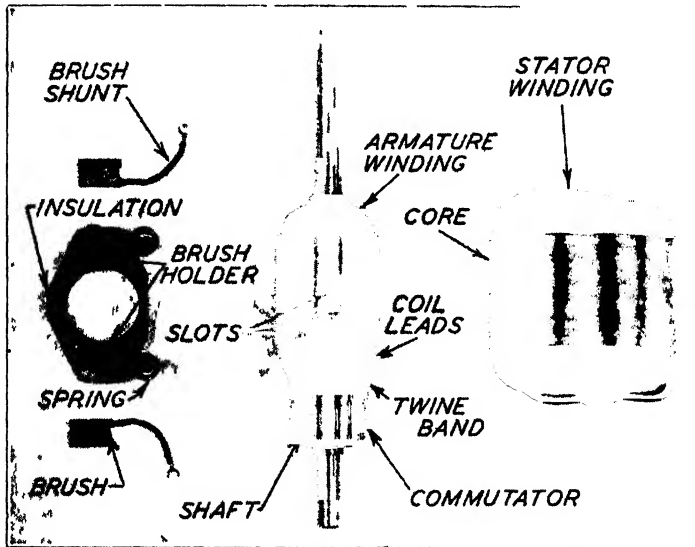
Parts of a Westinghouse Type AD Universal Motor
